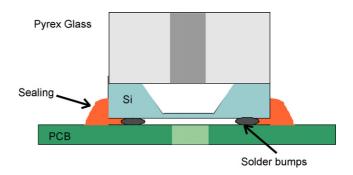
Cross-sectional drawing of a flip-chip soldered piezoresistive pressure sensor.
